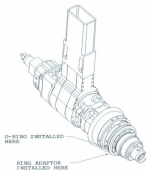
Installation positions of o-ring and pressure plate adaptor.
